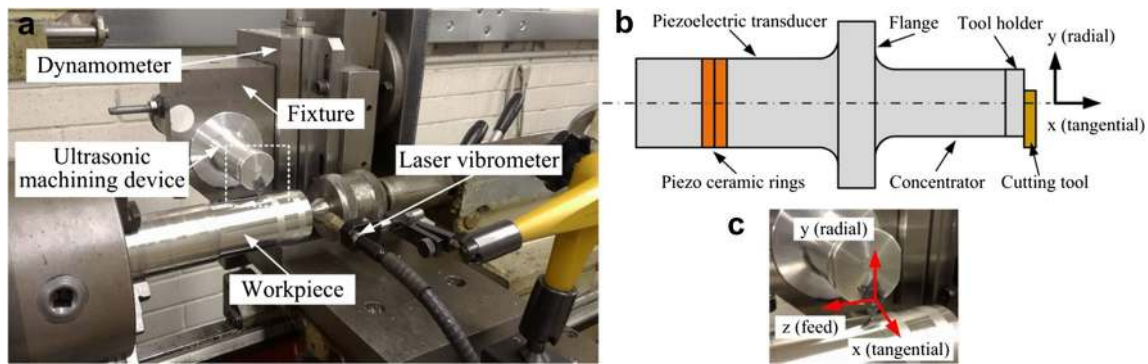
Experimental setup: a ultrasonic cutting assembly, b schematic of ultrasonic machining device, c axes of cutting tool’s movements
